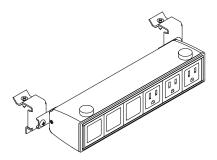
Rail Mounted Electrical Component for Tables (3+3 shown)
